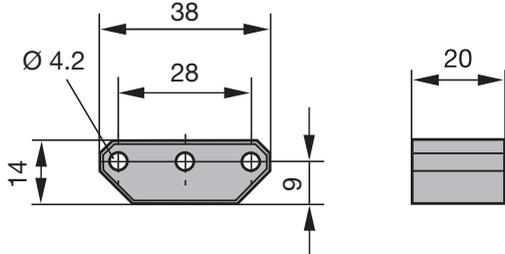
Installation dimensions of BTL5-P-3800-2 magnet
